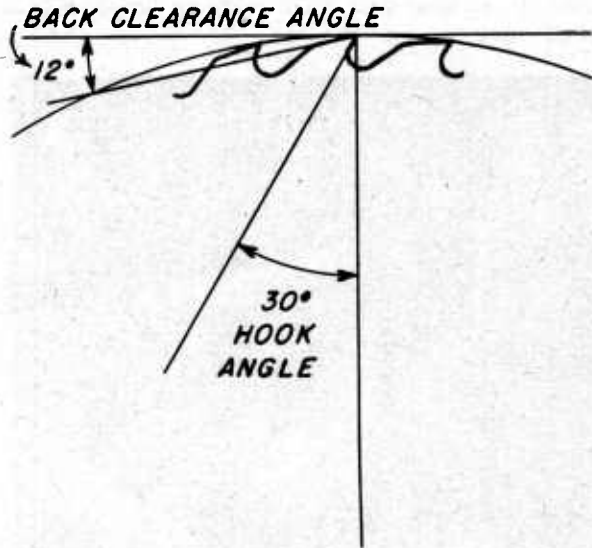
Design of tooth and gullet, showing proper clearance and hook angles.
